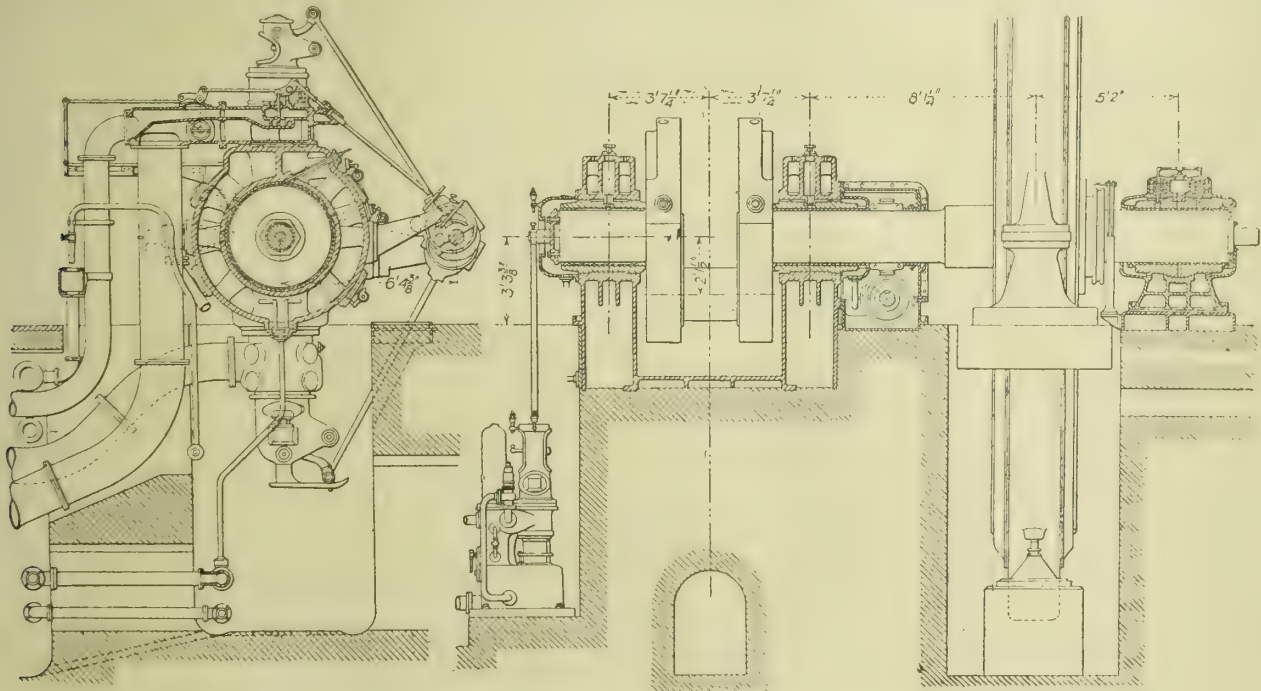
SECTIONS THROUGH CYLINDER AND BEARINGS OF THE THYSSSEN GAS ENGINE.
